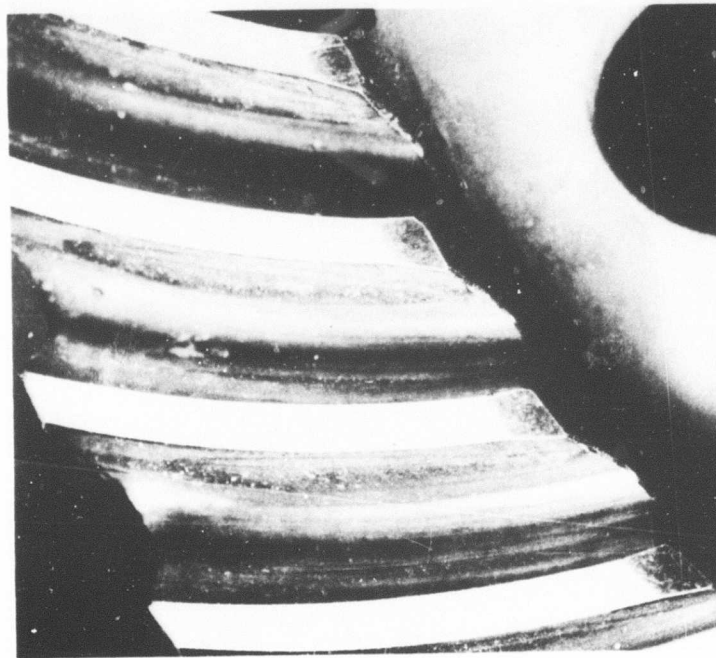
Pinion Assembly After Polyimide Retainer and Idler Gear Operation, Series 5.
